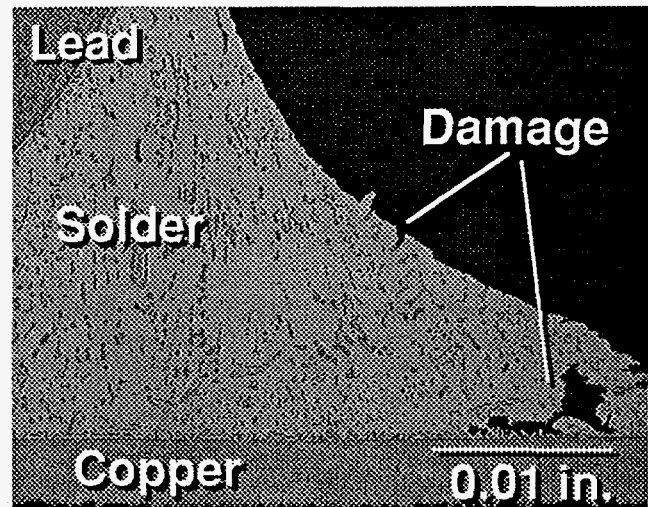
Optical micrograph of the SOIC gull wing solder joint exemplifying the as-fabricated condition.
